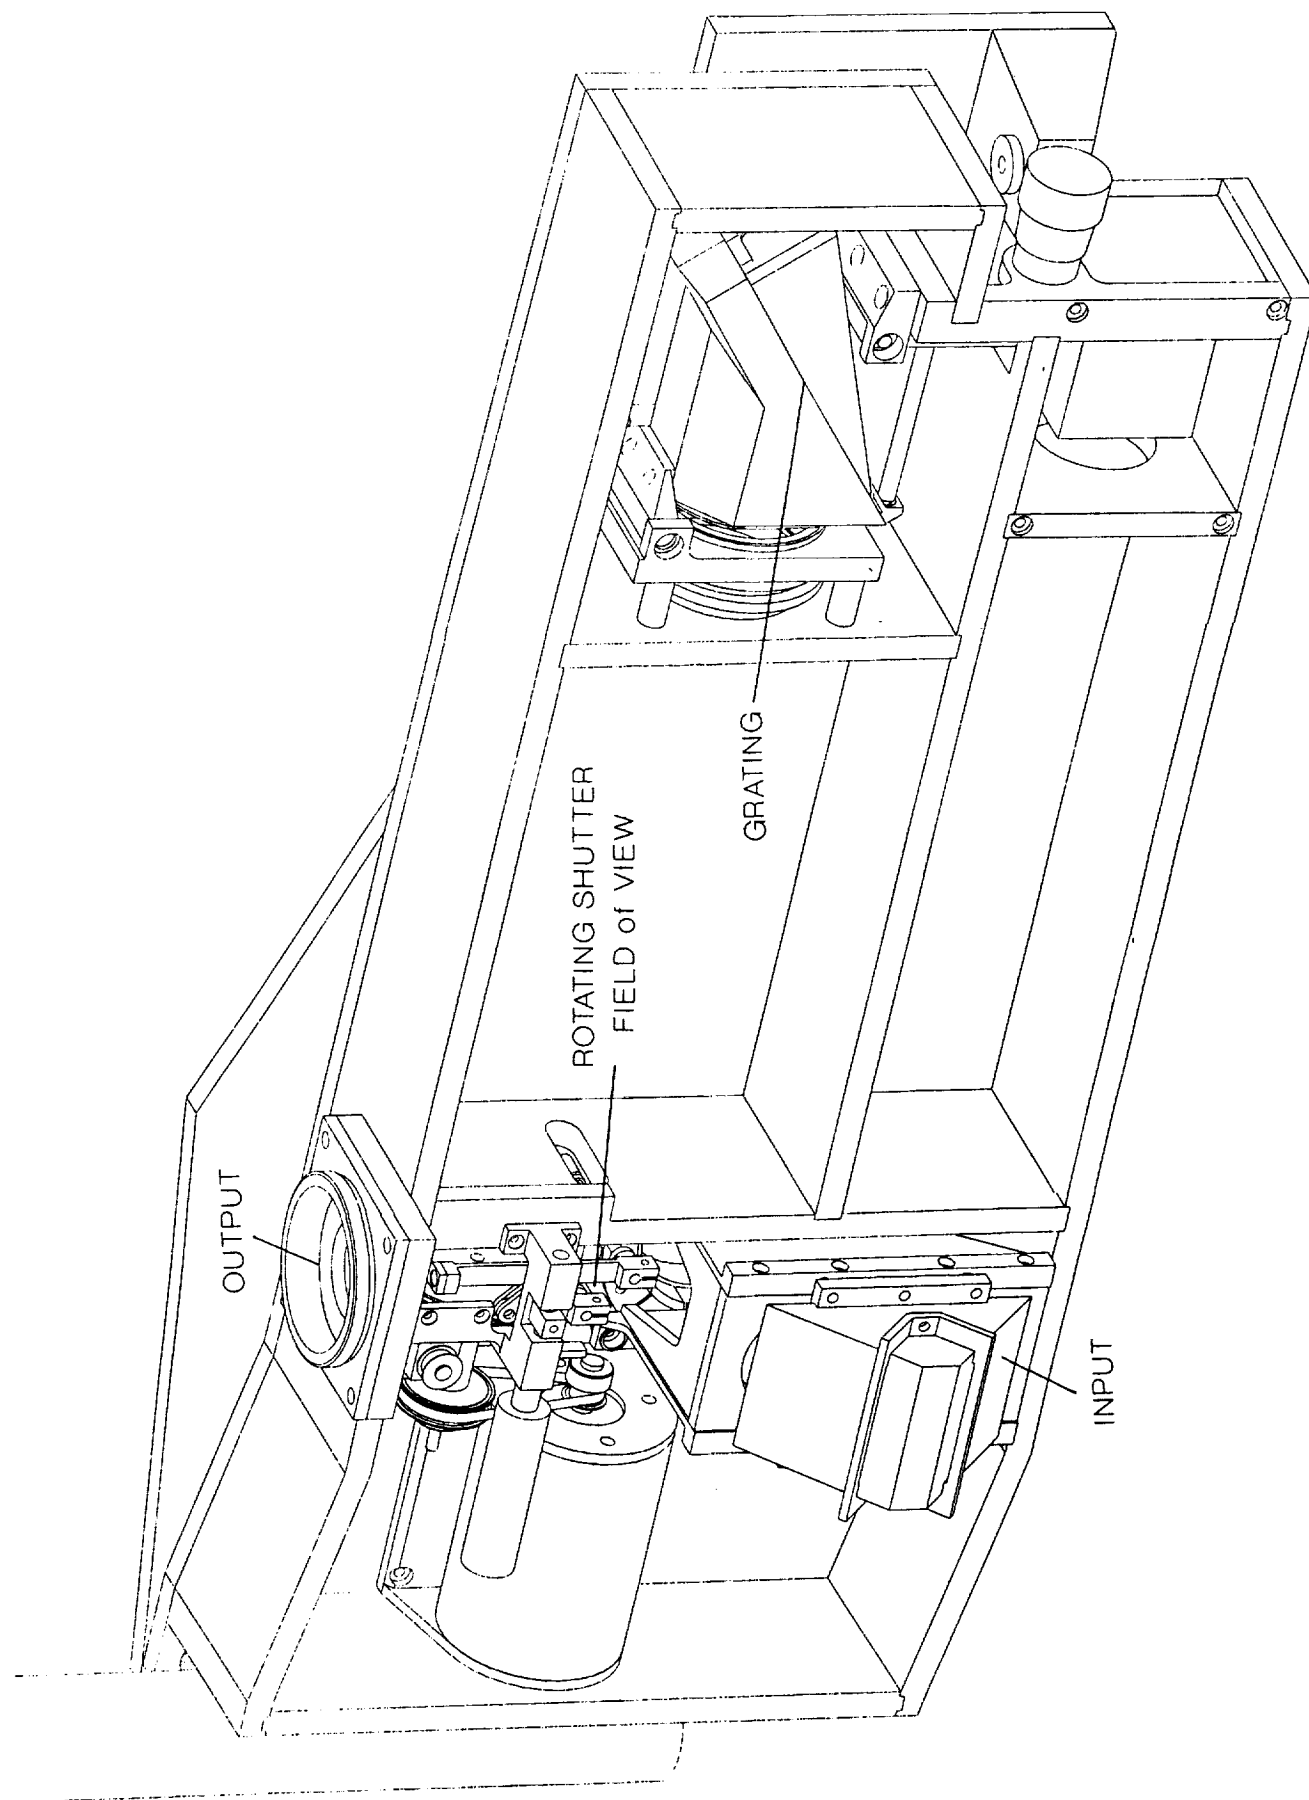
Mechanical Layout of the MTLRS#1 Receiver Package
